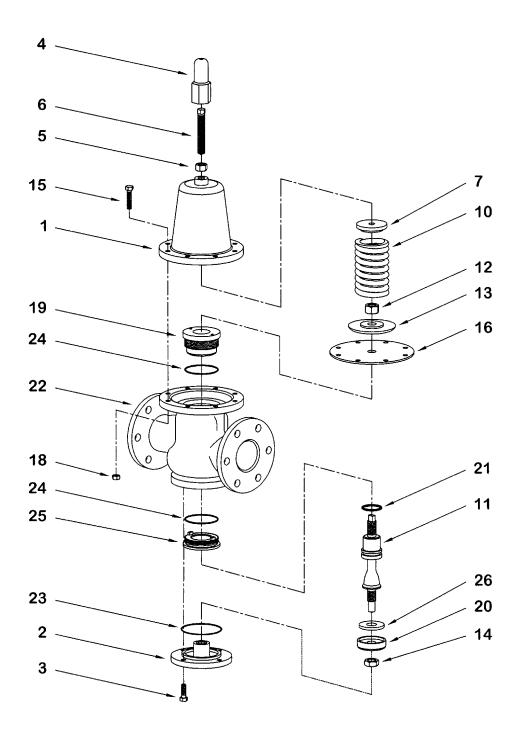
EXPLODED VIEW - TYPICAL 2" THROUGH 4" VALVE ASSEMBLY
